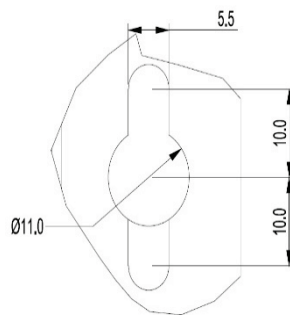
Detail mounting slide hole (wall/table mounting brackets)
